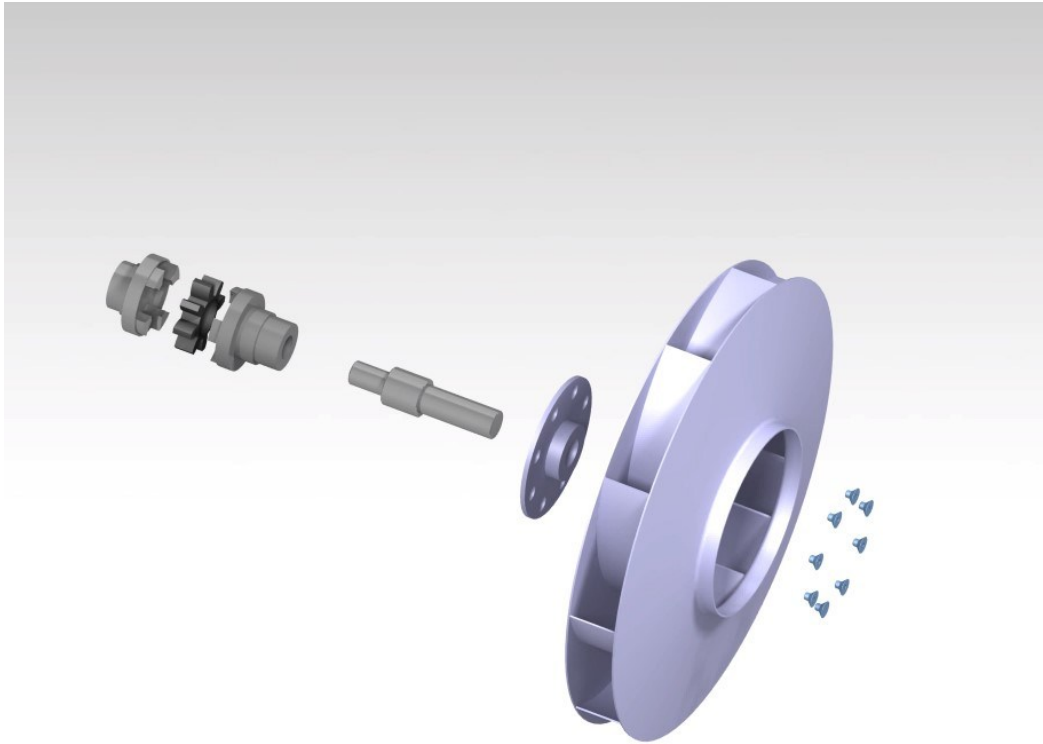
Exploded view of the assembly of the impeller with the shaft. At the end of the shaft a jaw-type mechanical coupler is connected.
